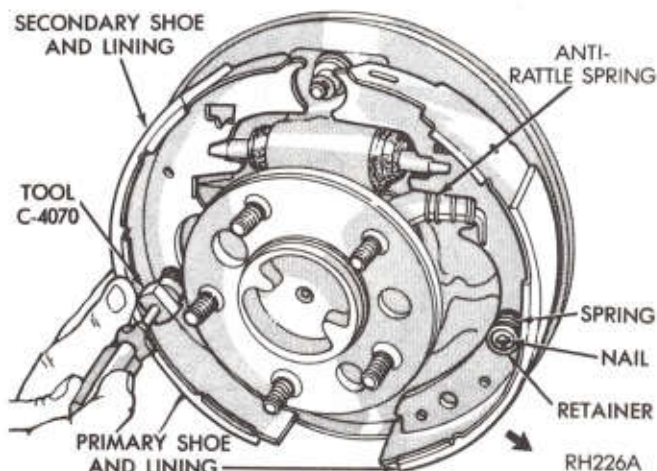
Removing or Installing Shoe Retainers, Springs, and Nails
